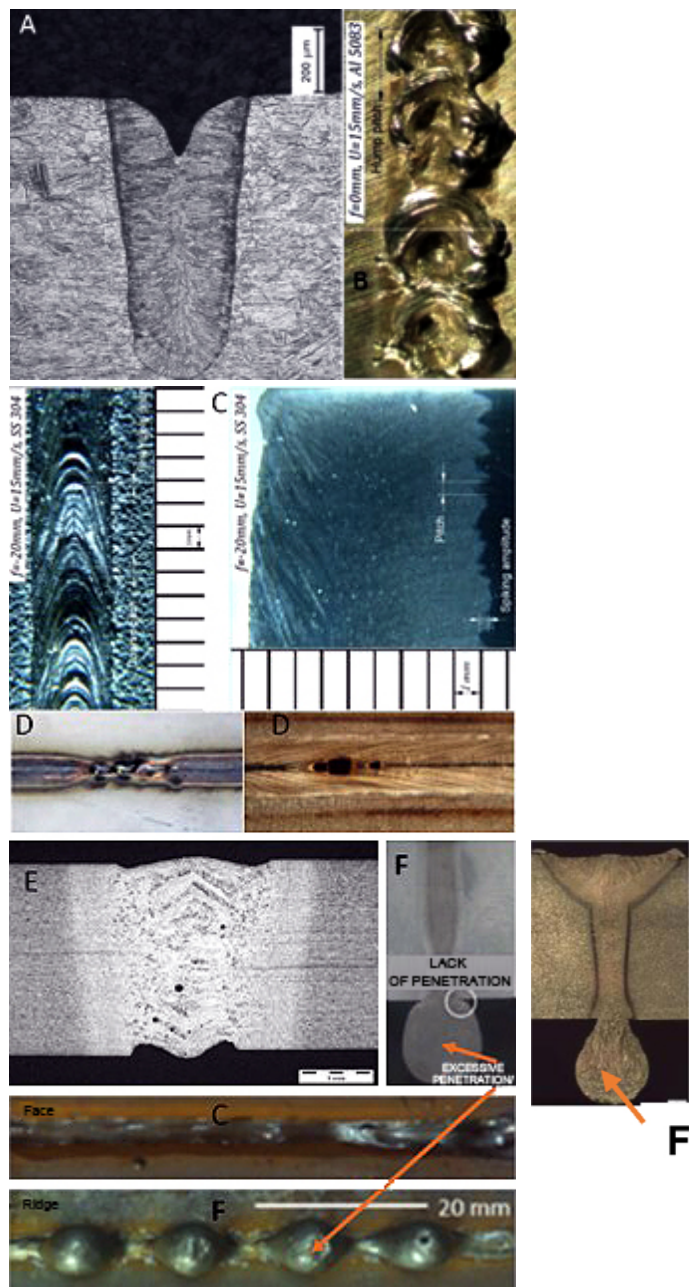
Typical external imperfections in laser welded joints: A) significant blow-out (weld face concavity), B) metal spatter and significant weld face irregularities, C) weld face irregularities – humping (corrugated excessively large face reinforcement, D) burn-throughs, E) weld face and weld root undercuts, F) significant excessive penetration of the weld metal in the root of the joint and the lack of penetration in the weld root [1–5, 17]
